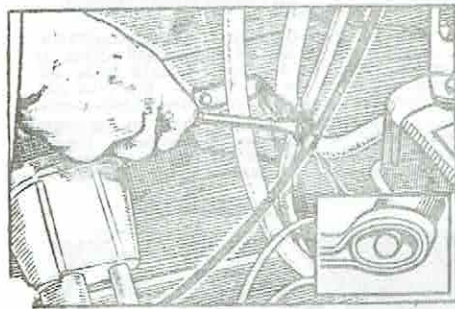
SECURING. Avoid crushing the flexible drive by over-tightening the clip. The flex can be crushed between two moving components.
